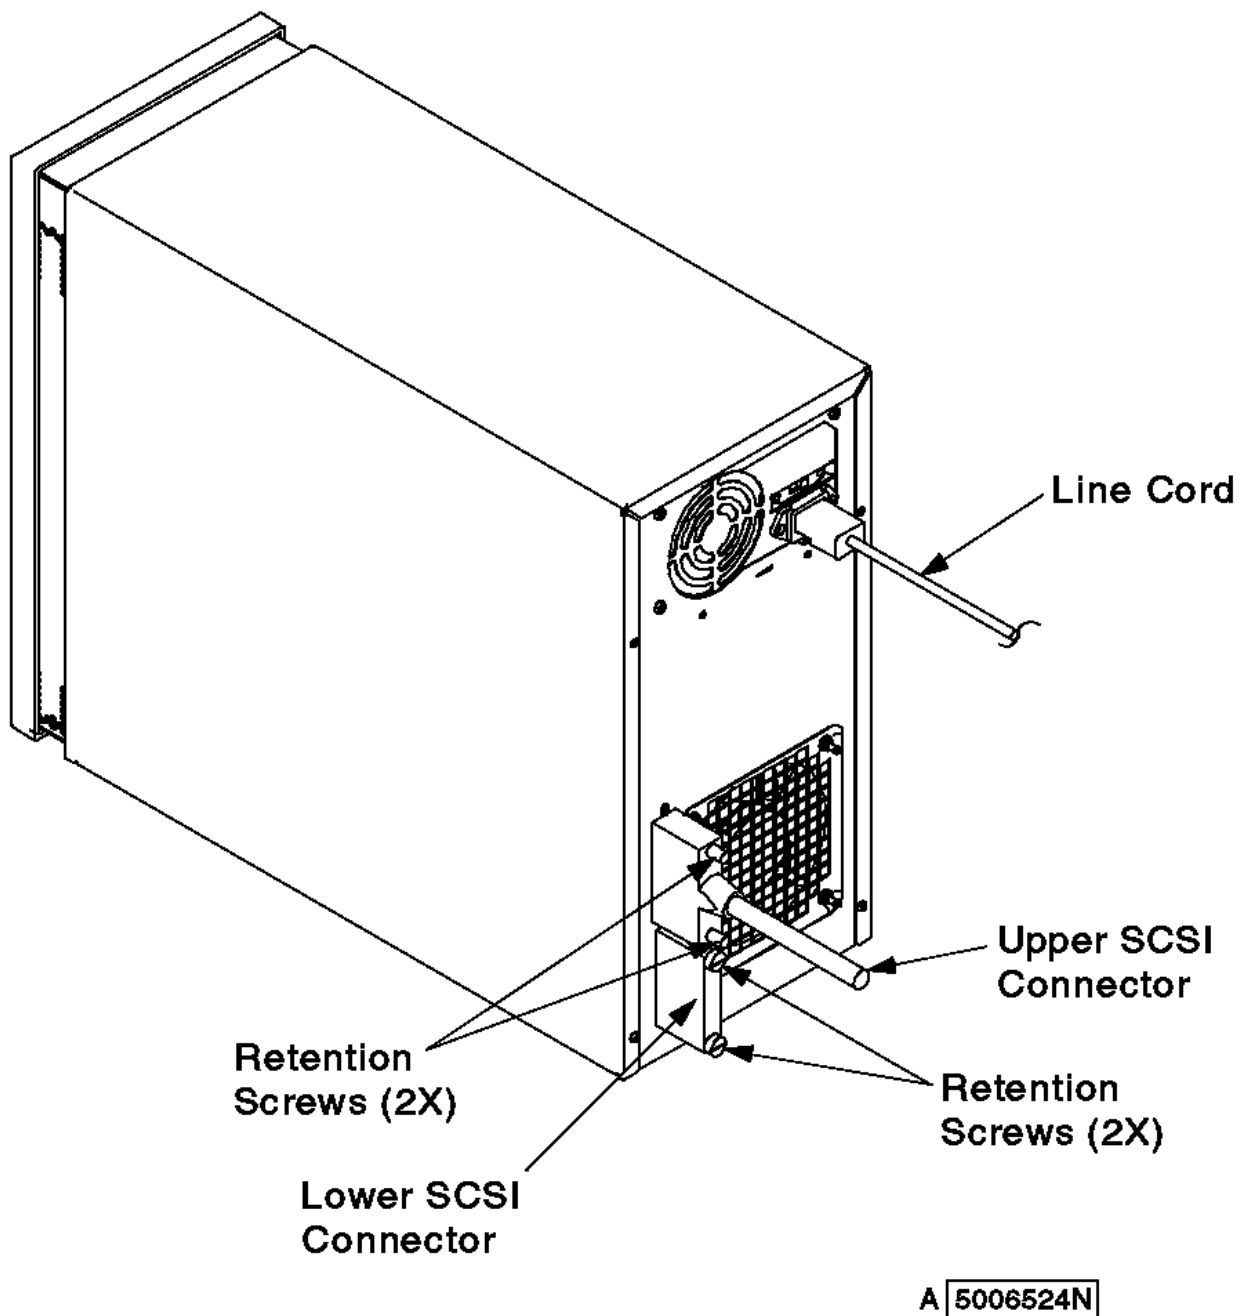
Rear View of the 7131 Storage Tower with Upper and Lower SCSI Connectors
